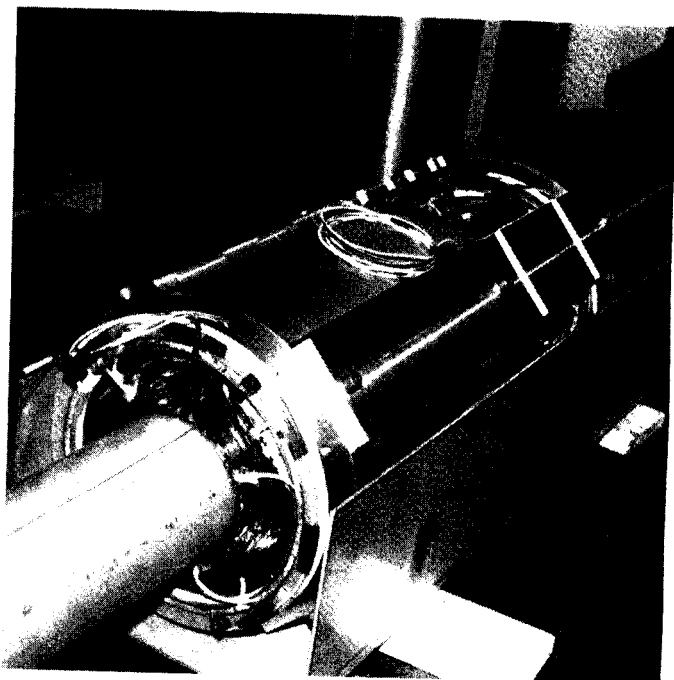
Doublet iron-coil assembly sitting in its LHe container bottom with bore tube partially installed.
